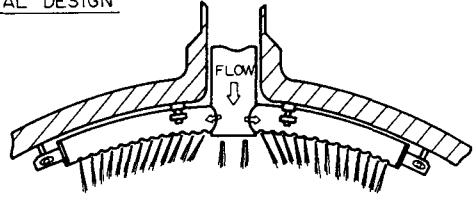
Thermal fatigue cracks on nozzle corner and sparger hole edge.
